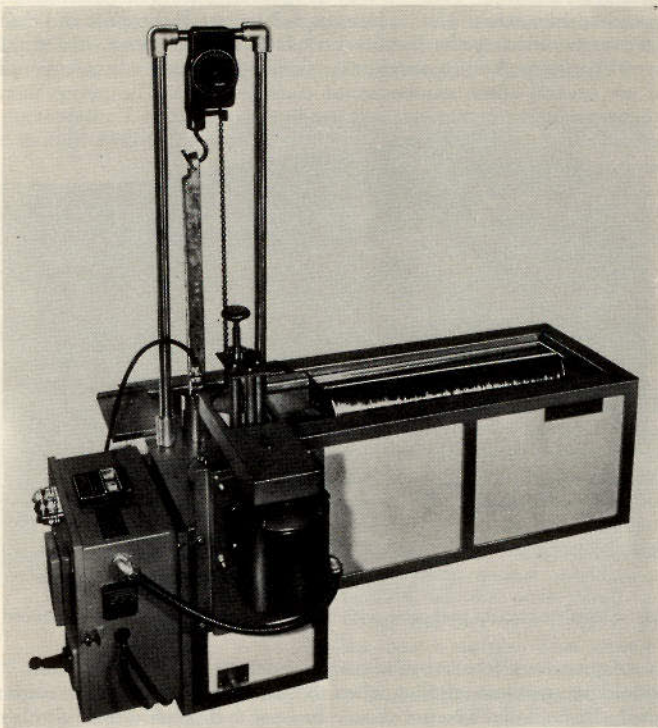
Wave-Solder pot with nozzle and automatic solder level control (Electrovert, Inc.).
